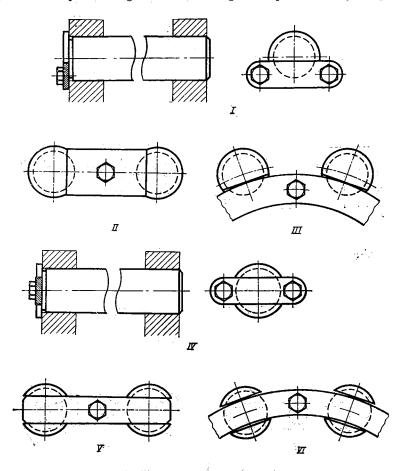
Shouldered pivot pins fixed against axial and angular displacements by end plates
